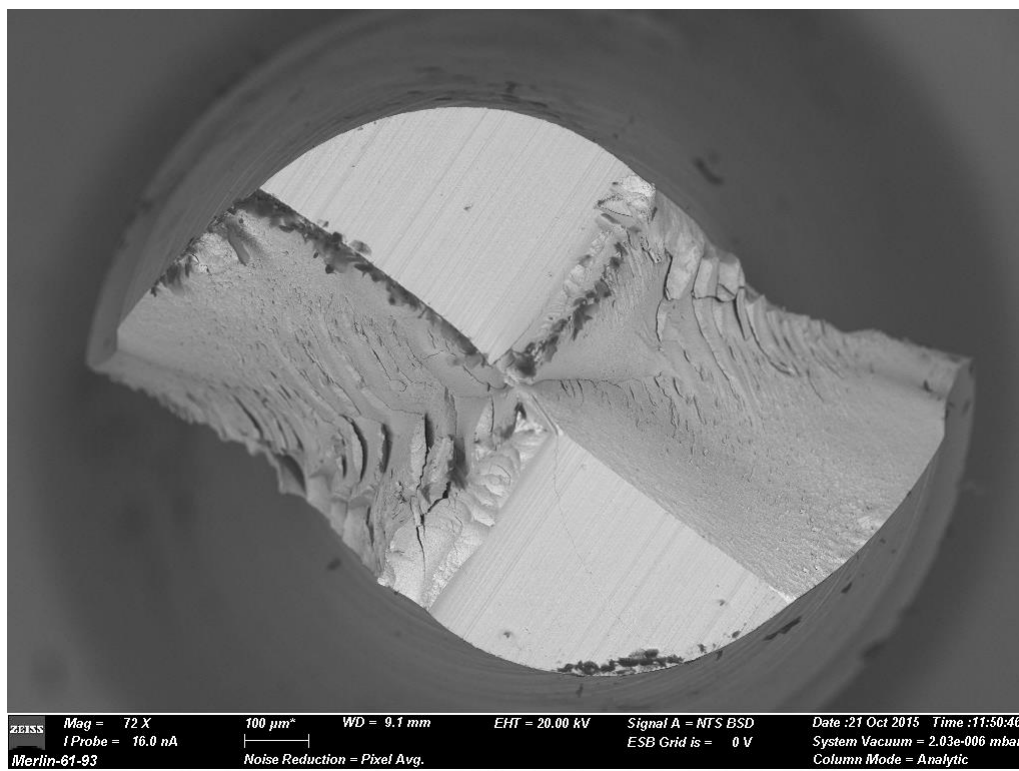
Experimental run 10: Tungsten carbide tool after machining with parameters $v_c=70.69$ [m/min], $v_f=827.03$ [mm/min] and $a_p=106.42$ [μm]
